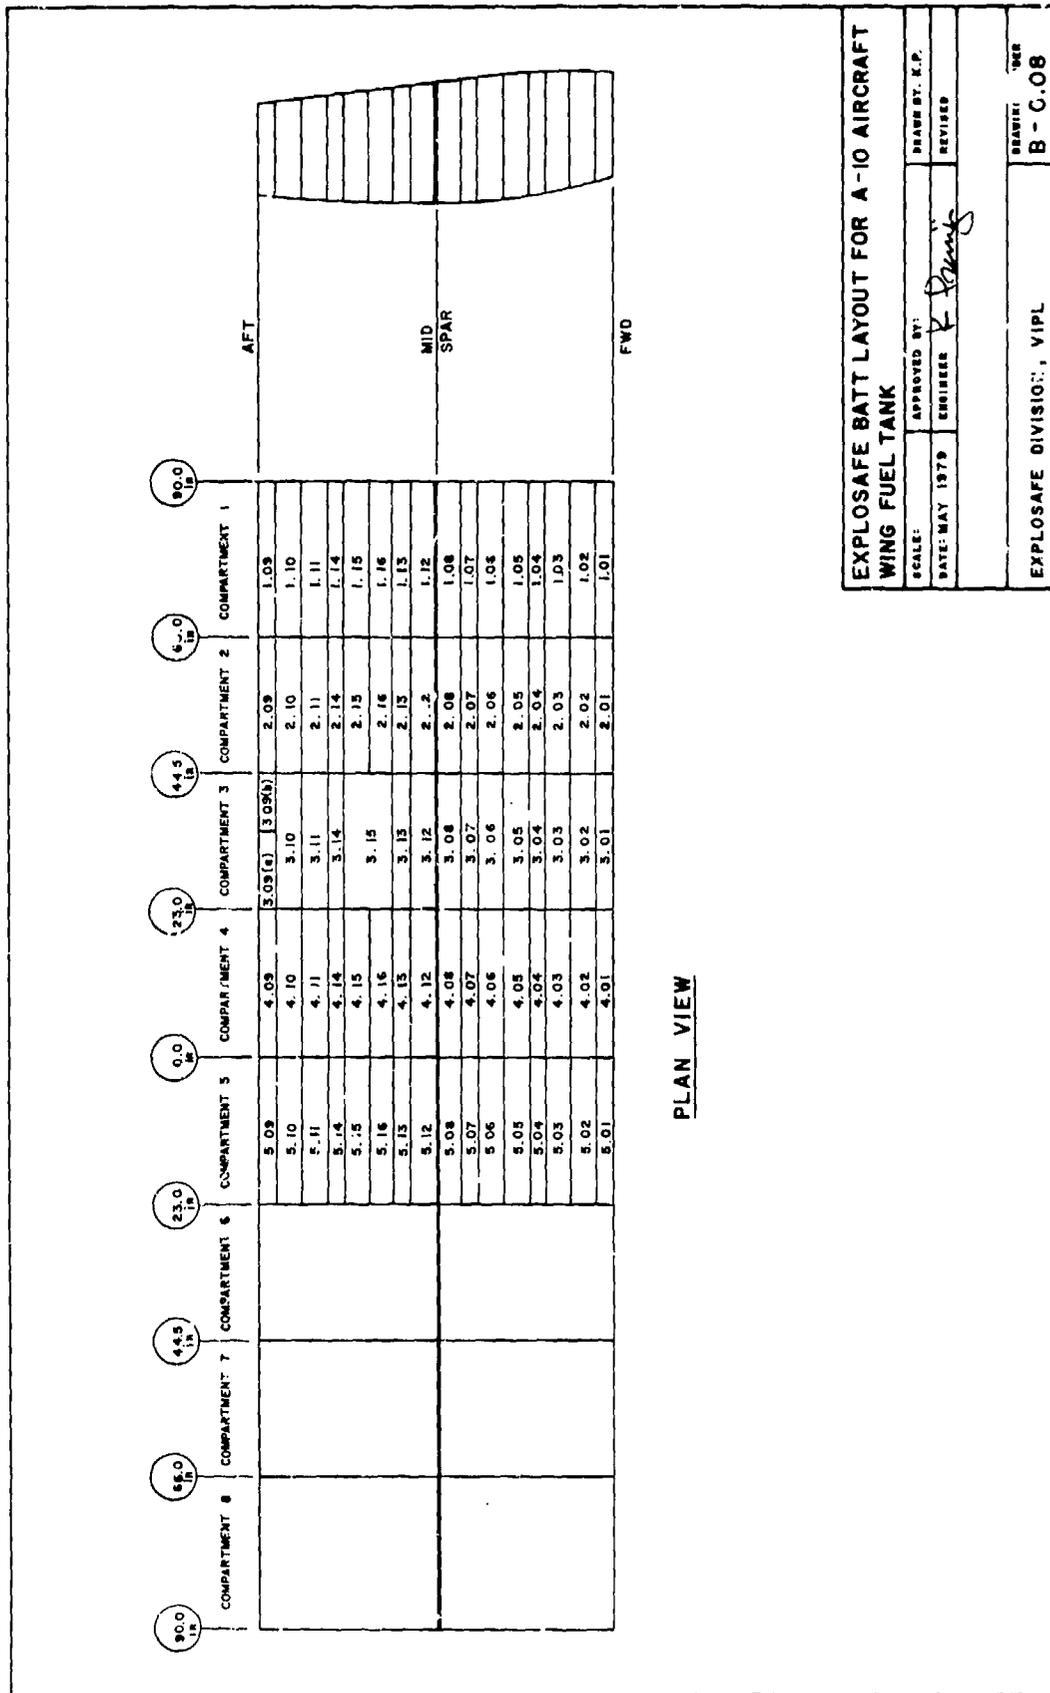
Batt Layout for A-10 Aircraft Wing Tank
